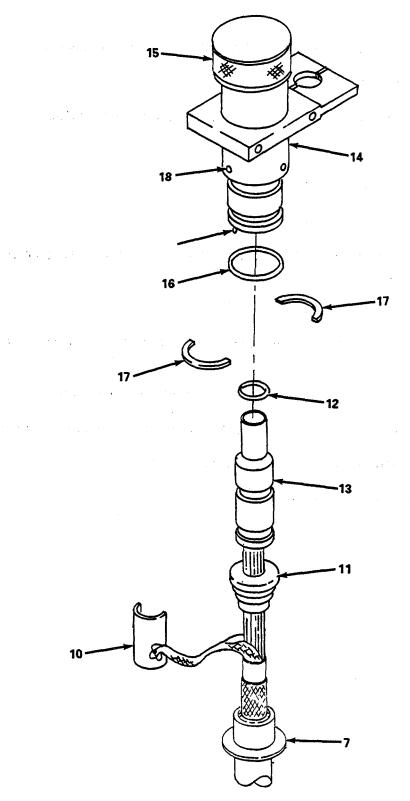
Communications Cable, Fabrication (Sheet 5 of 6).
